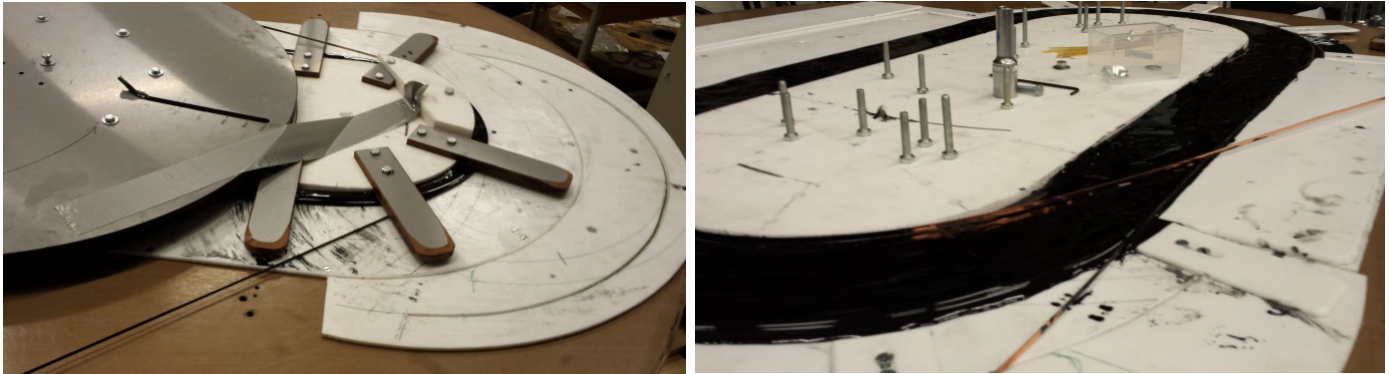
Winding table during winding of the first layer (left) and second layer (right) of a double pan-cake MgB₂ coil.
